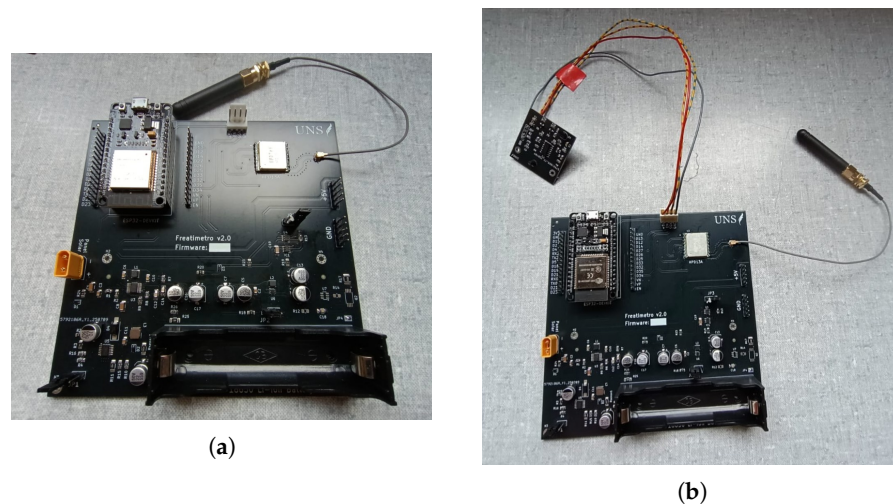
Final Assembled PCBs. (a) Main board assembled PCB; (b) Main board assembled PCB with level sensor module PCB connected.
